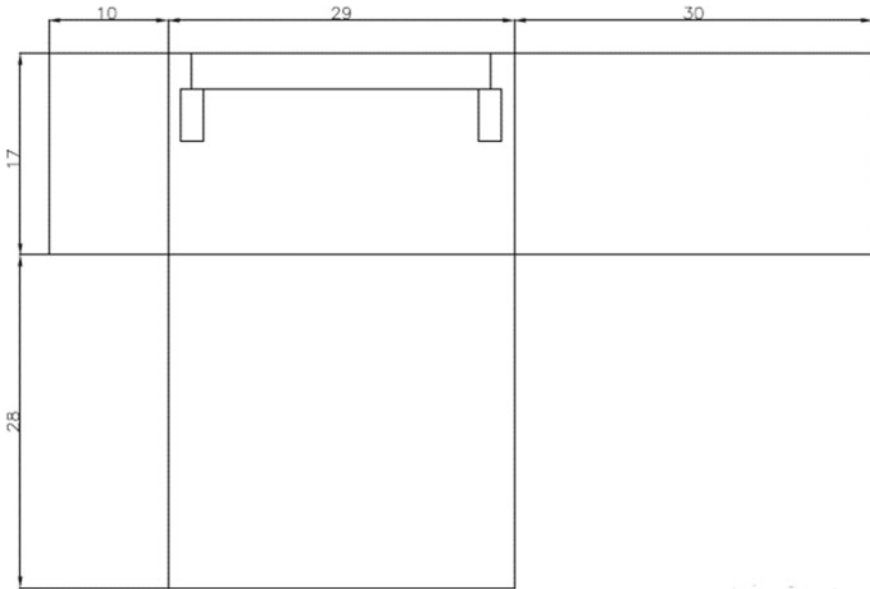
Layout of assembly unit after implementing the ergonomic principles
